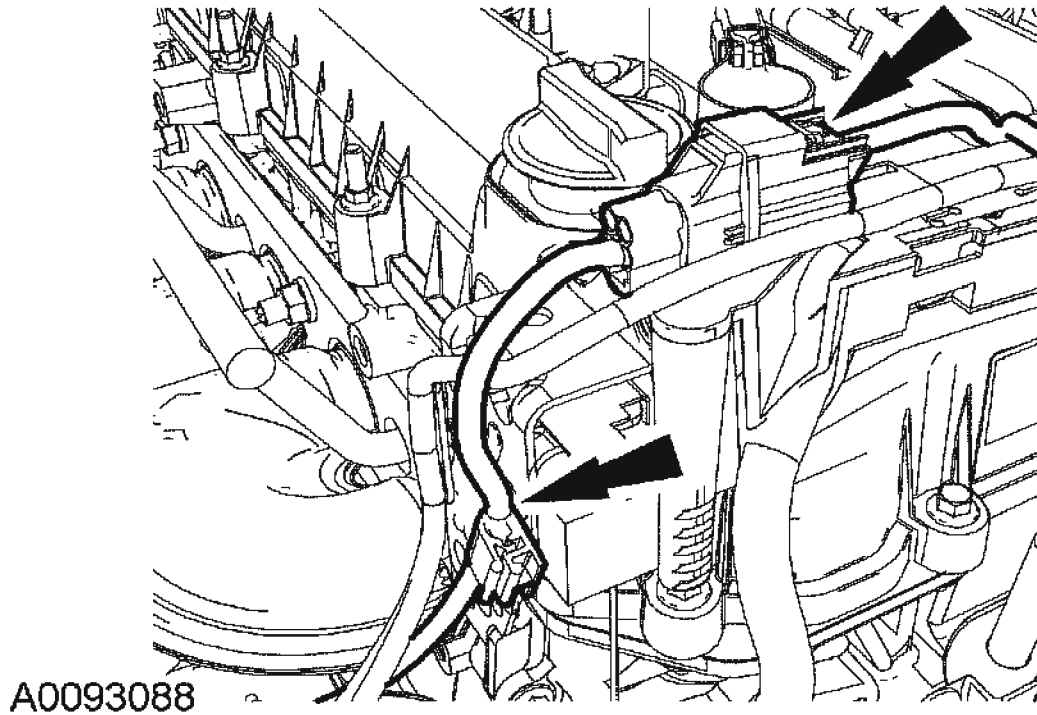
Connecting Upper Exhaust Sensor Electrical Connector And Retainer
